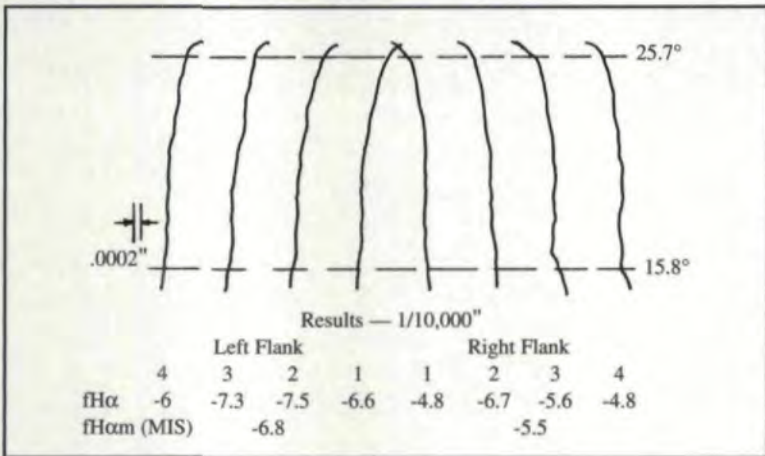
Involute tests of 48-tooth gear from noisy gear set.
